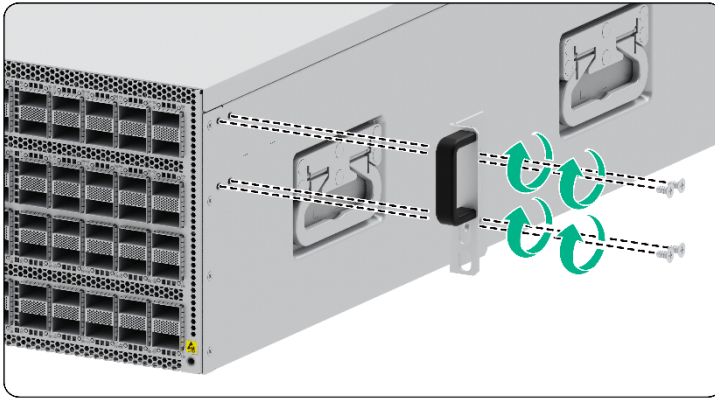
Attaching the mounting brackets and chassis rails to the S9855-48CD8D/S9855-24B8D/S9855-32D switch (port-side mounting position for the mounting brackets)
